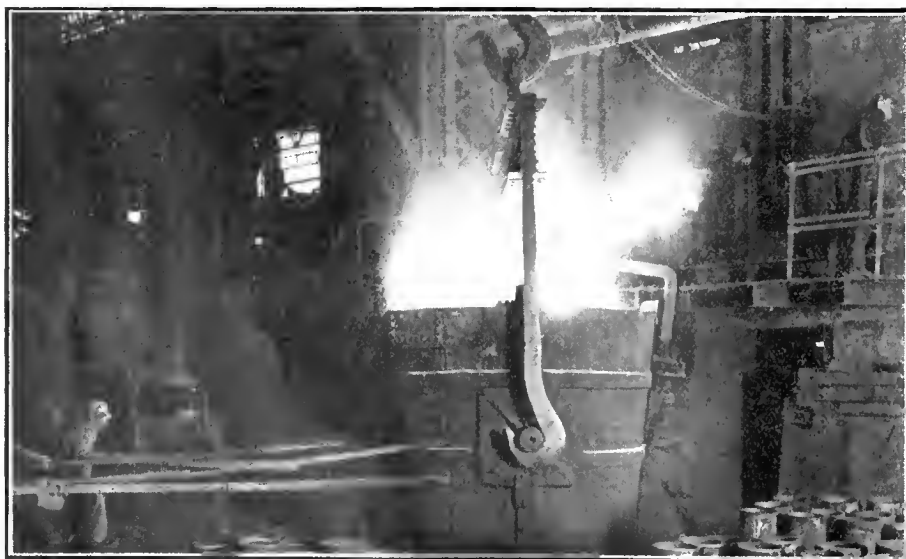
FILLING BOTTOM POURING LADLE AT OPEN-HEARTH FURNACE.
